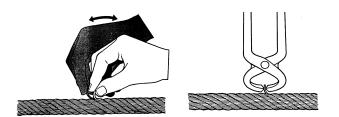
removing protruding wires 2.4.3. Lubricating the rope in service
